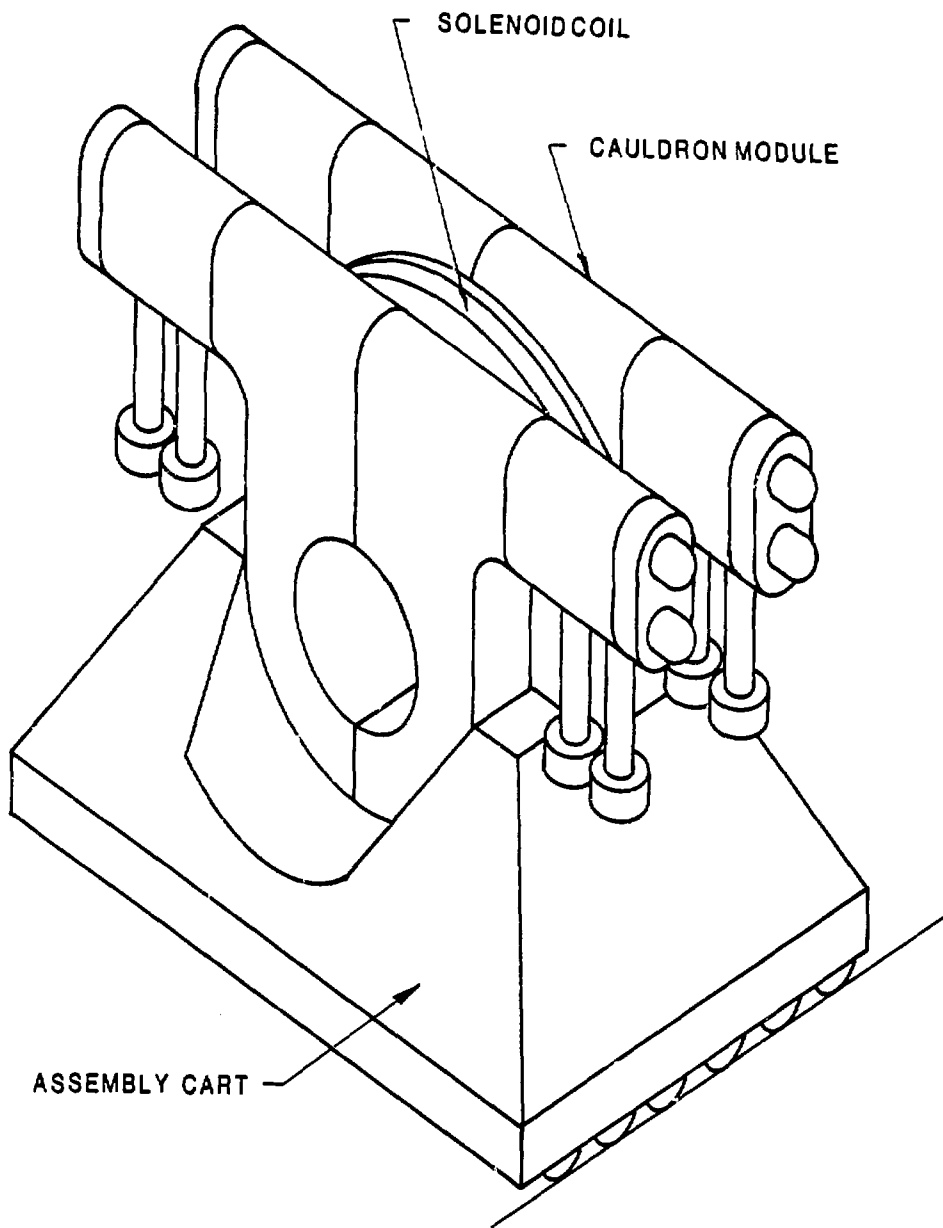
Four modules and a solenoid coil assembled into a unit cell.
